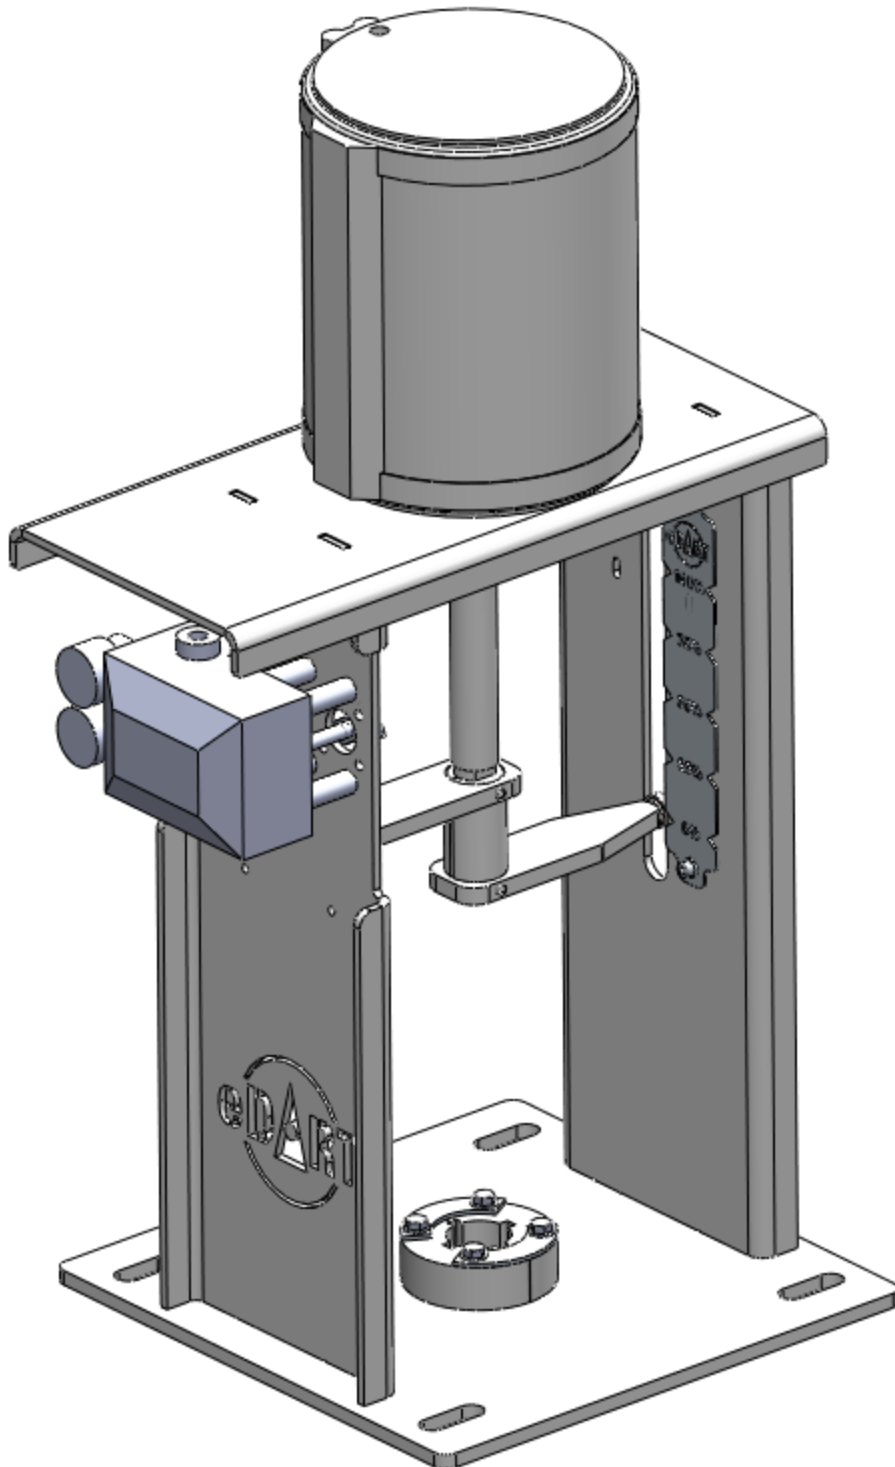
View of the actuator mounted on the pedestal showing details of the feedback mechanism, the means of attaching the positioner and actuator mounting. Notice the slot in the rear plate to provide anti-rotation. A ball bearing runs in this slot. This pedestal front plate can mount various positioner types, an alternative front plate locates proximity switches for on-off applications.
